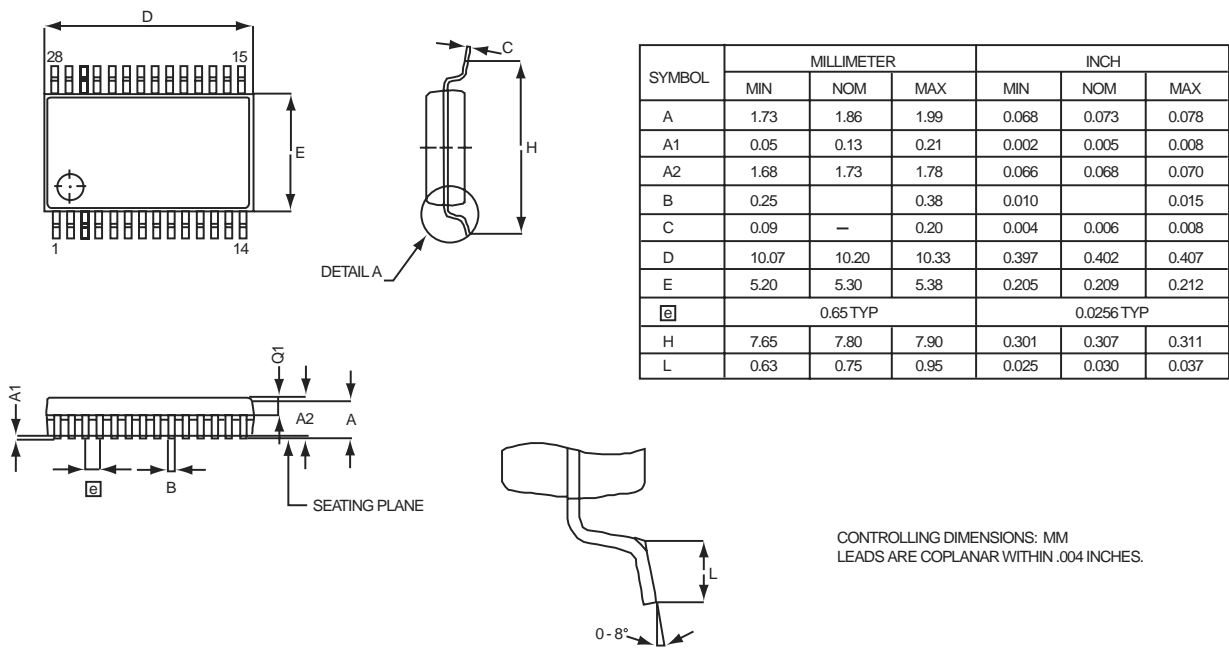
28-Pin Small Shrink Outline Package (SSOP)
